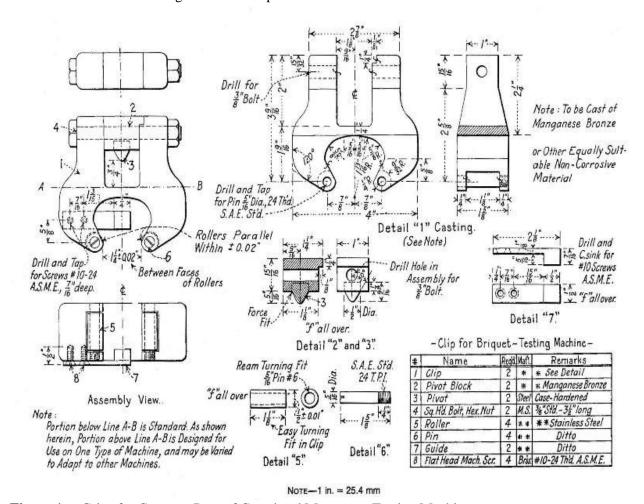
Grips for Constant Rate of Crosshead Movement Testing Machine
